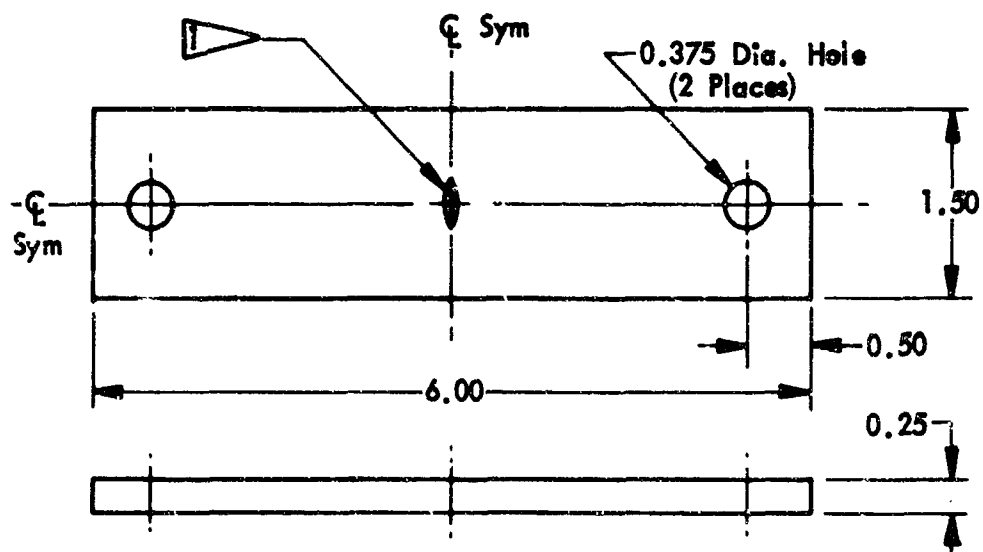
2219-T81 AS-WELDED BEND SPECIMEN
